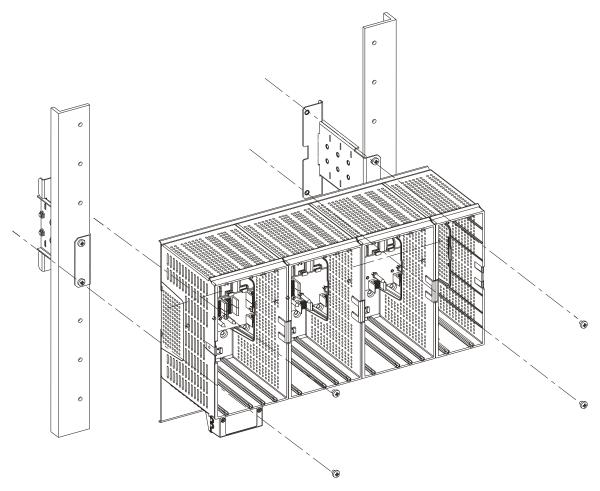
Installation of ACE3600 RTU 19" Rack- Exploded View
